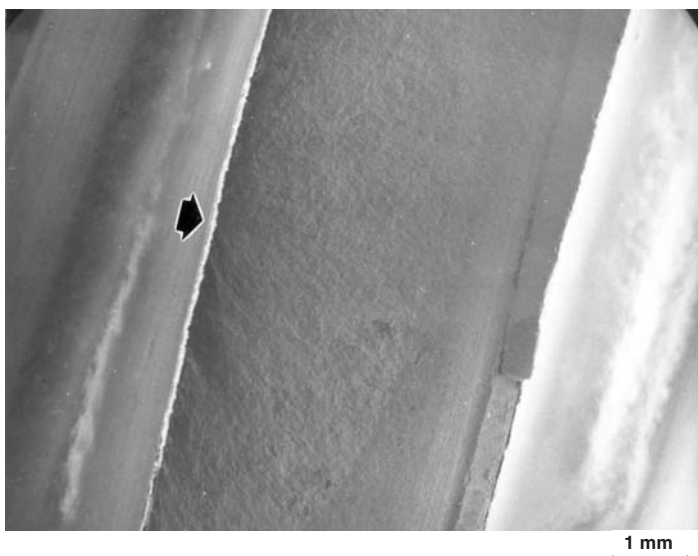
Fracture surface showing the fracture origin
